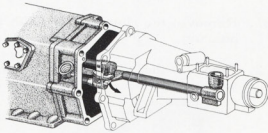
Extension Housing X6192 No. 1 Removal
